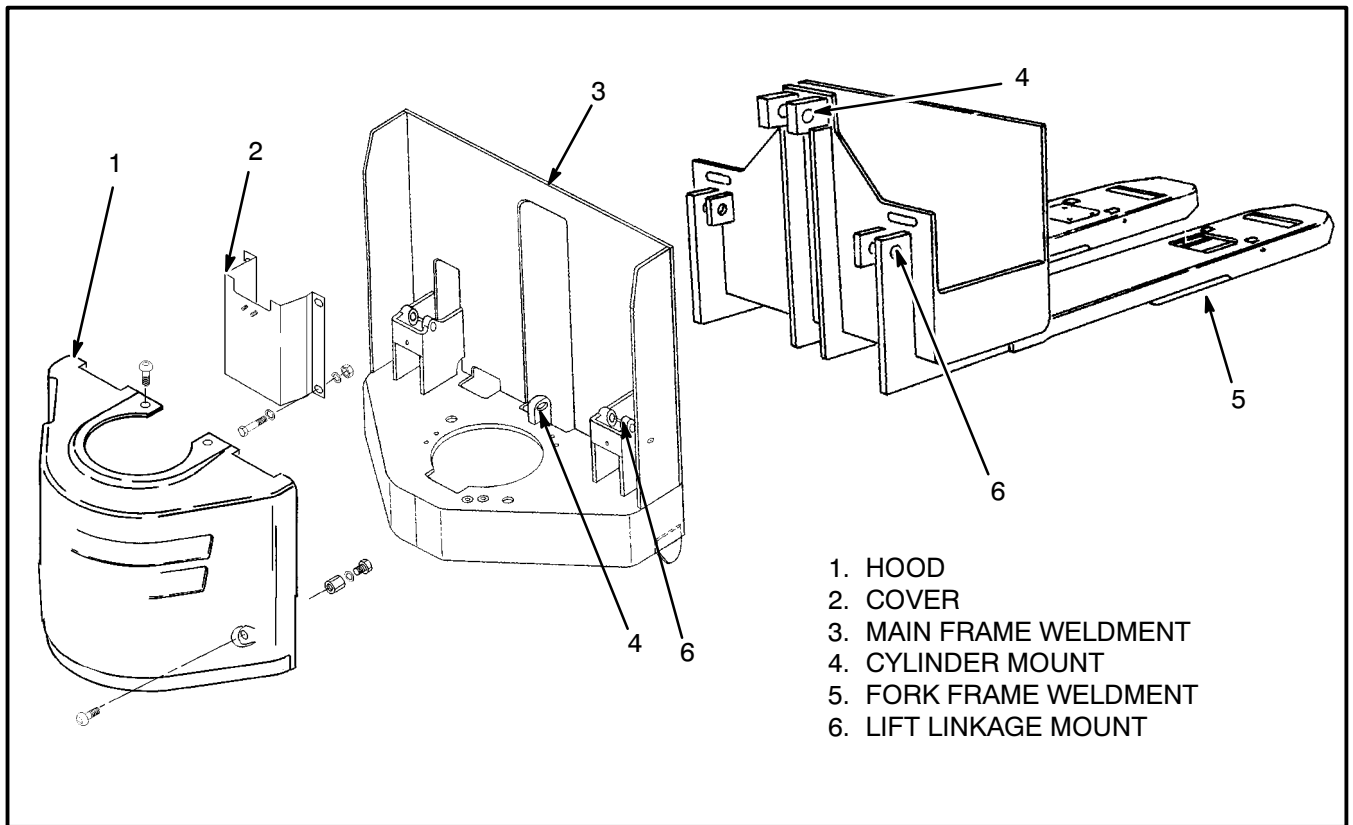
FRAME WELDMENT - W60-80XT
